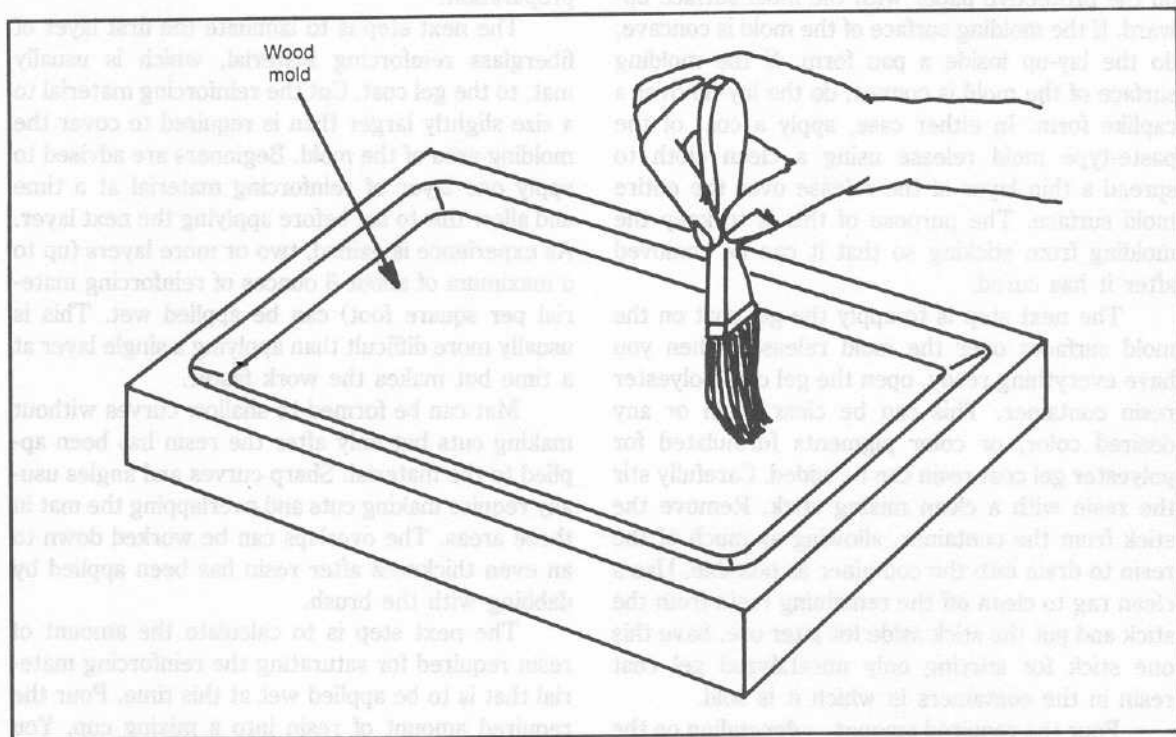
Brush a smooth thin layer of catalyzed polyester resin on the wood molding surface.
